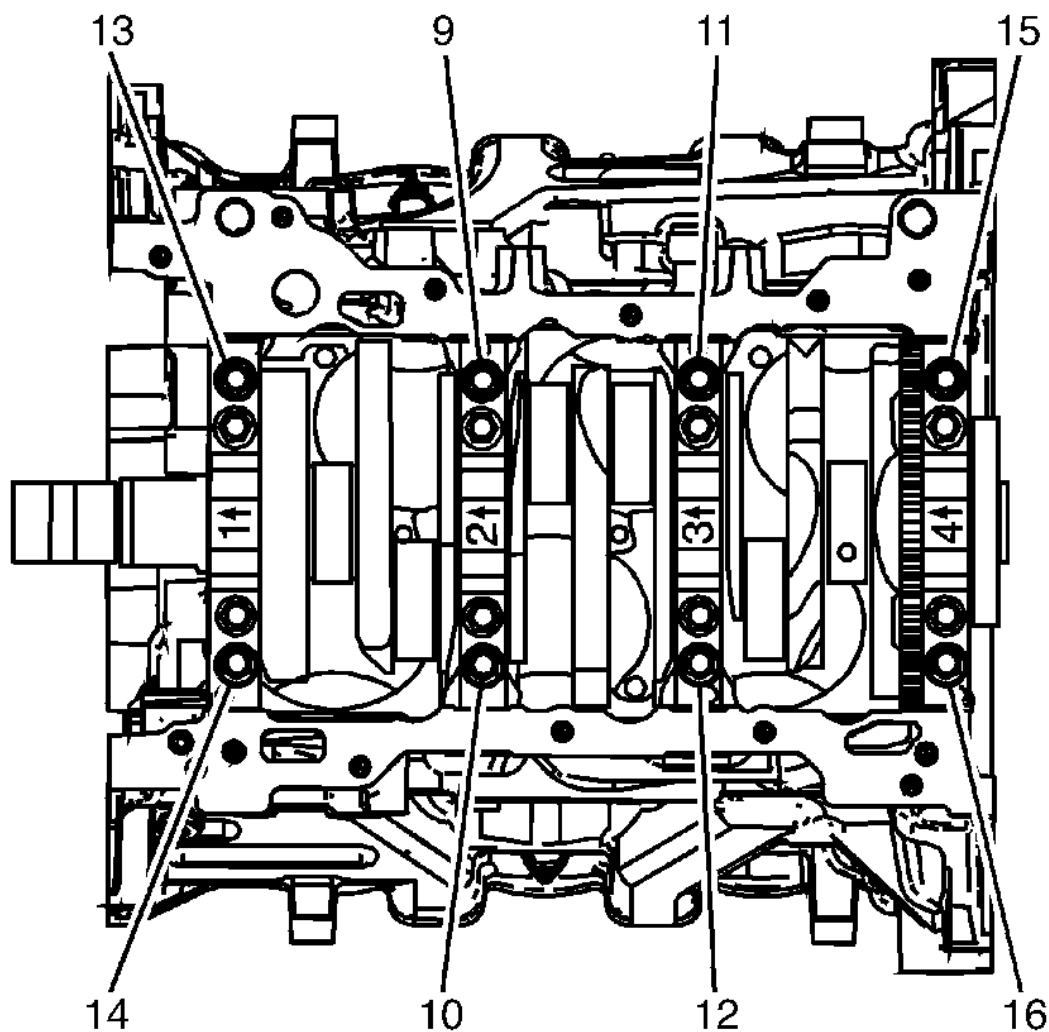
Identifying Inboard Crankshaft Bearing Cap To Cylinder Block Retaining Bolt Tightening Sequence
